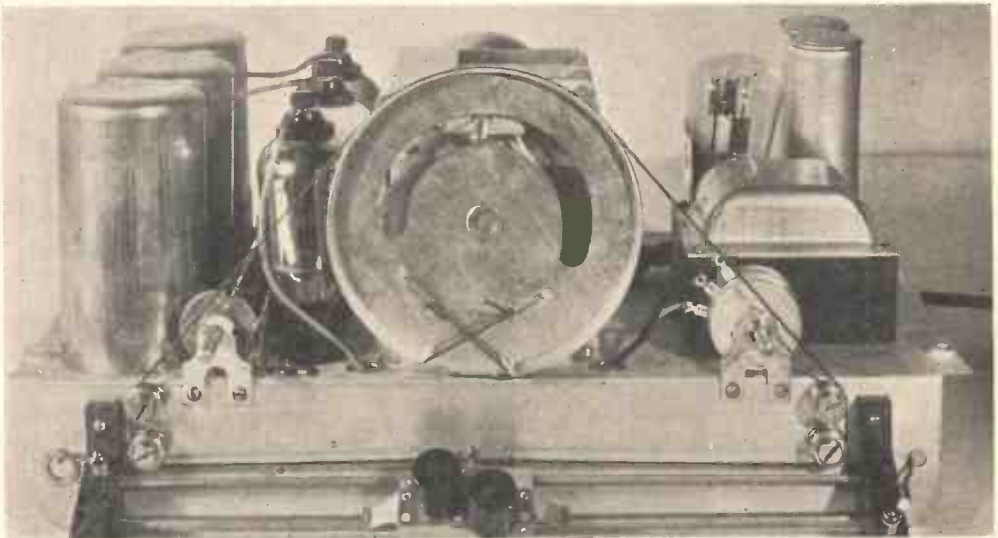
THE COMPLETELY ASSEMBLED DRIVE OF THE ULTRA PANTHER RECEIVER.
